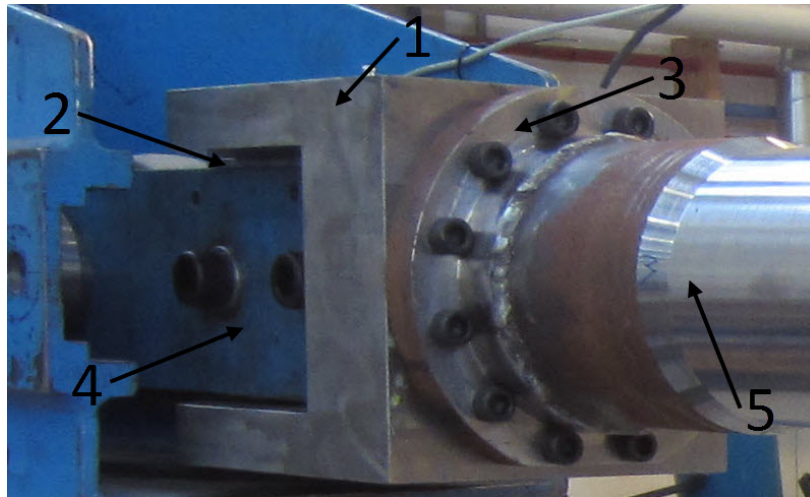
Final assembly of the pipe-rig connection. Flange (1), block bearing - not visible (2), flange (3), grip (4) and the pipe (5).
